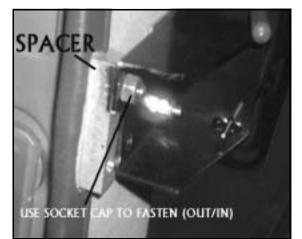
RIGHT-DOOR ANGLE/CLEVIS BRACKET ASSEMBLY INSTALLATION
